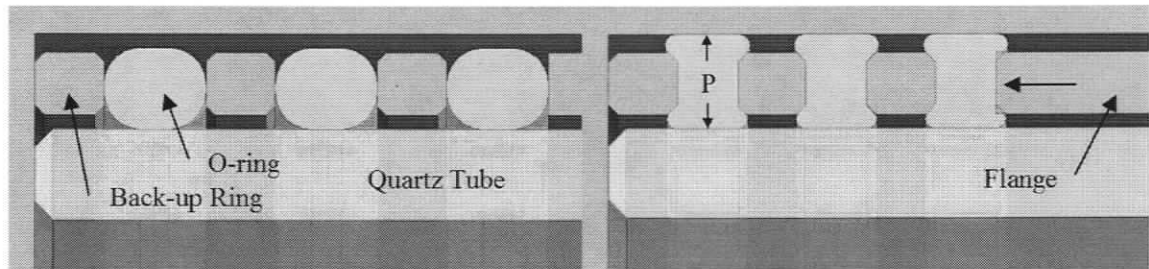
O-ring crush seal, before (left) and after assembly (right).
